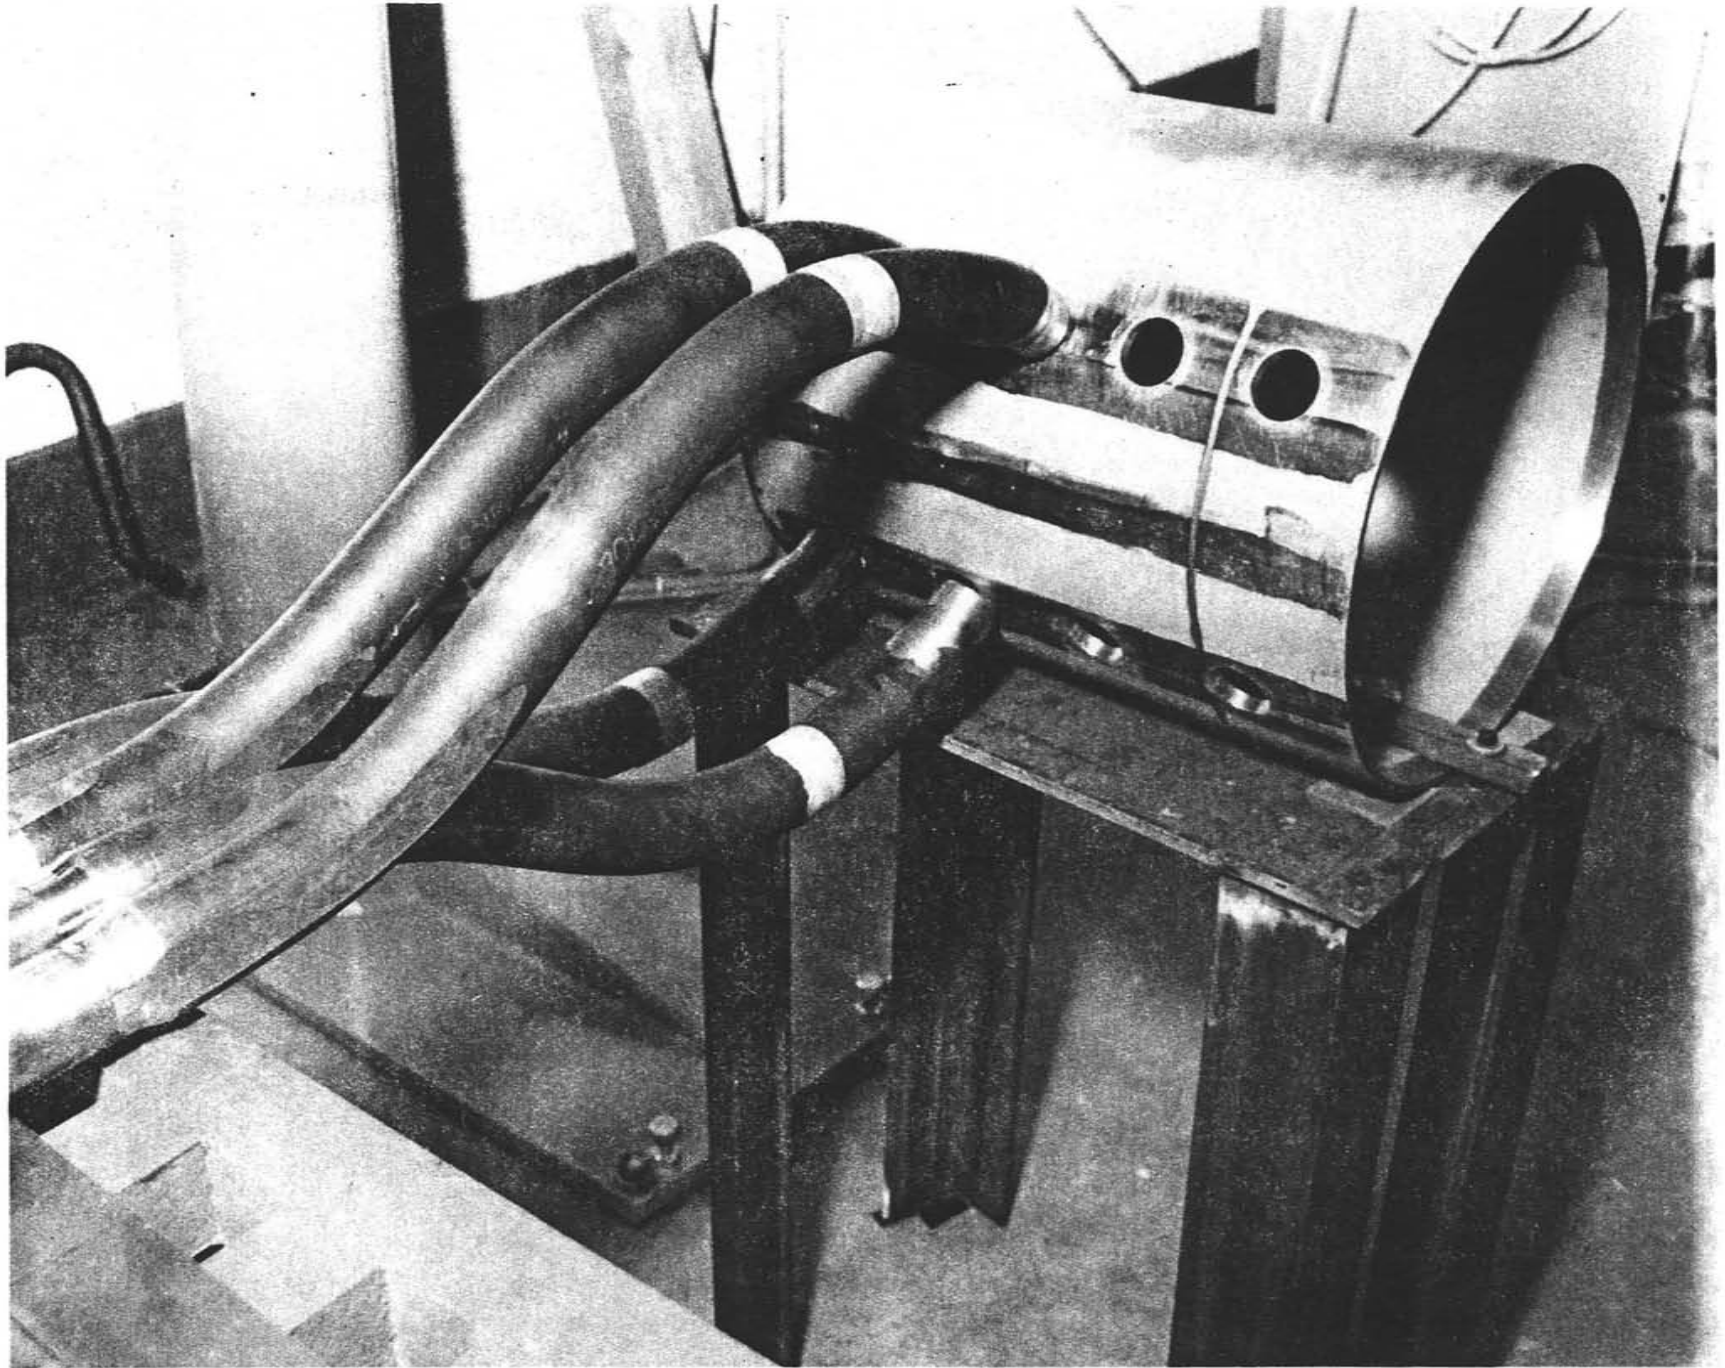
SAFE END-TO-HEADER SOCKET WELD
